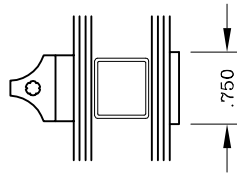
/2 Scale – For Custom Size Drawing Contact Graham
